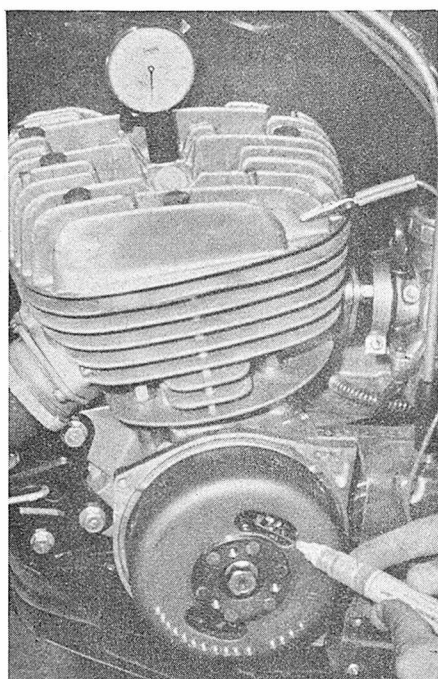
Checking point opening with a dial gage and static timing light. Gage shown is available from Central Tool Co.
